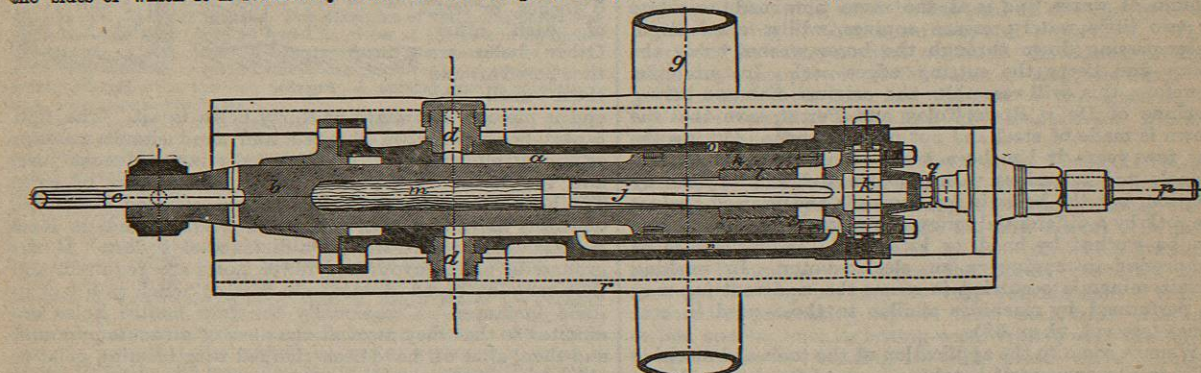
Horizontal Section of Darlington's Rock-Drill.—Scale $\frac{1}{4}$ in.
